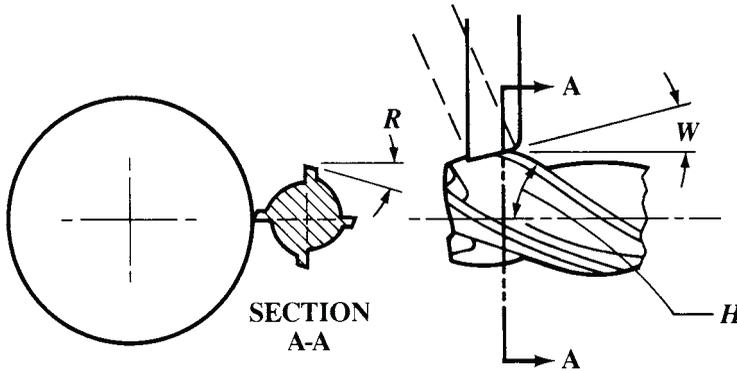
Setup for Grinding Eccentric Type Radial Relief Angle
